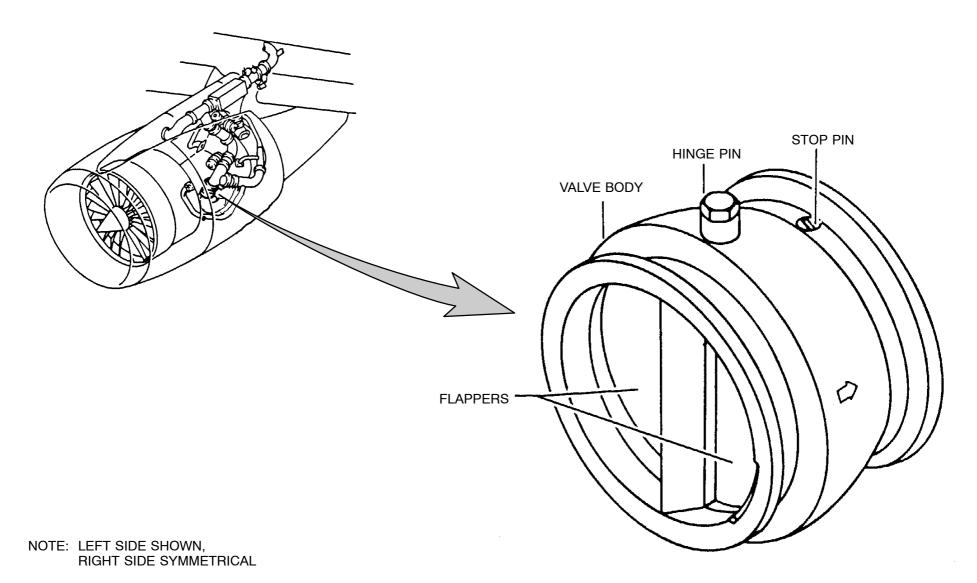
Intermediate Pressure Bleed Check Valve (IPV)
